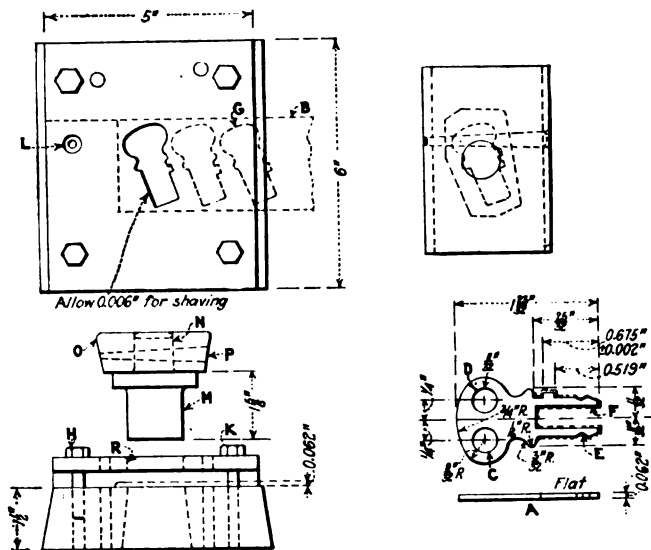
EXAMPLE OF PLAIN BLANKING DIE AND PUNCH FOR KEY
